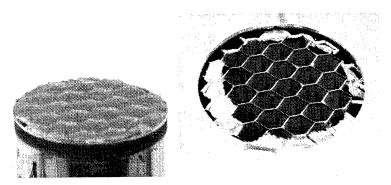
Failure surfaces resulting from tensile testing of the Untreated honeycomb and AF130-2 adhesive conditioned 30 days at 70°C/100%R.H., indicating fillet bond pull-out.
